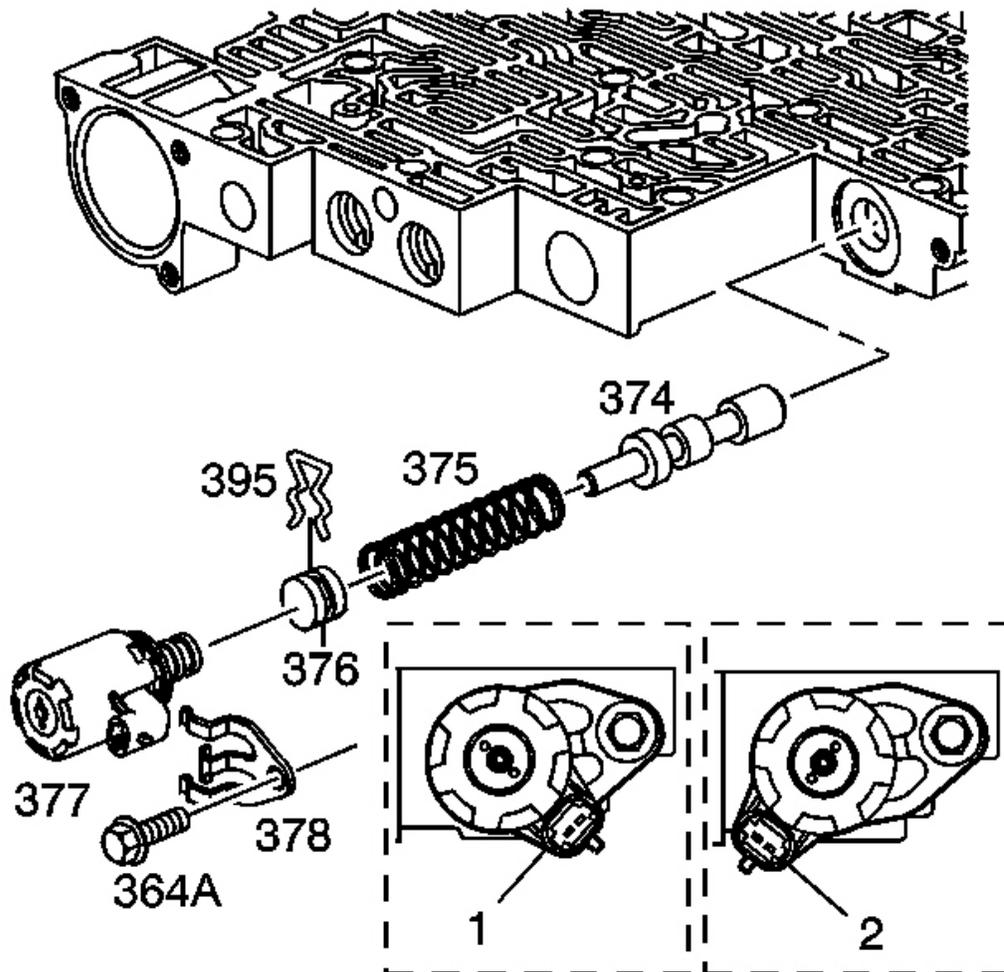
Pressure Control Solenoid, Bore Plug Retainer, Bore Plug, Actuator Feed Limit Valve Spring & Actuator Feed Limit Valve
